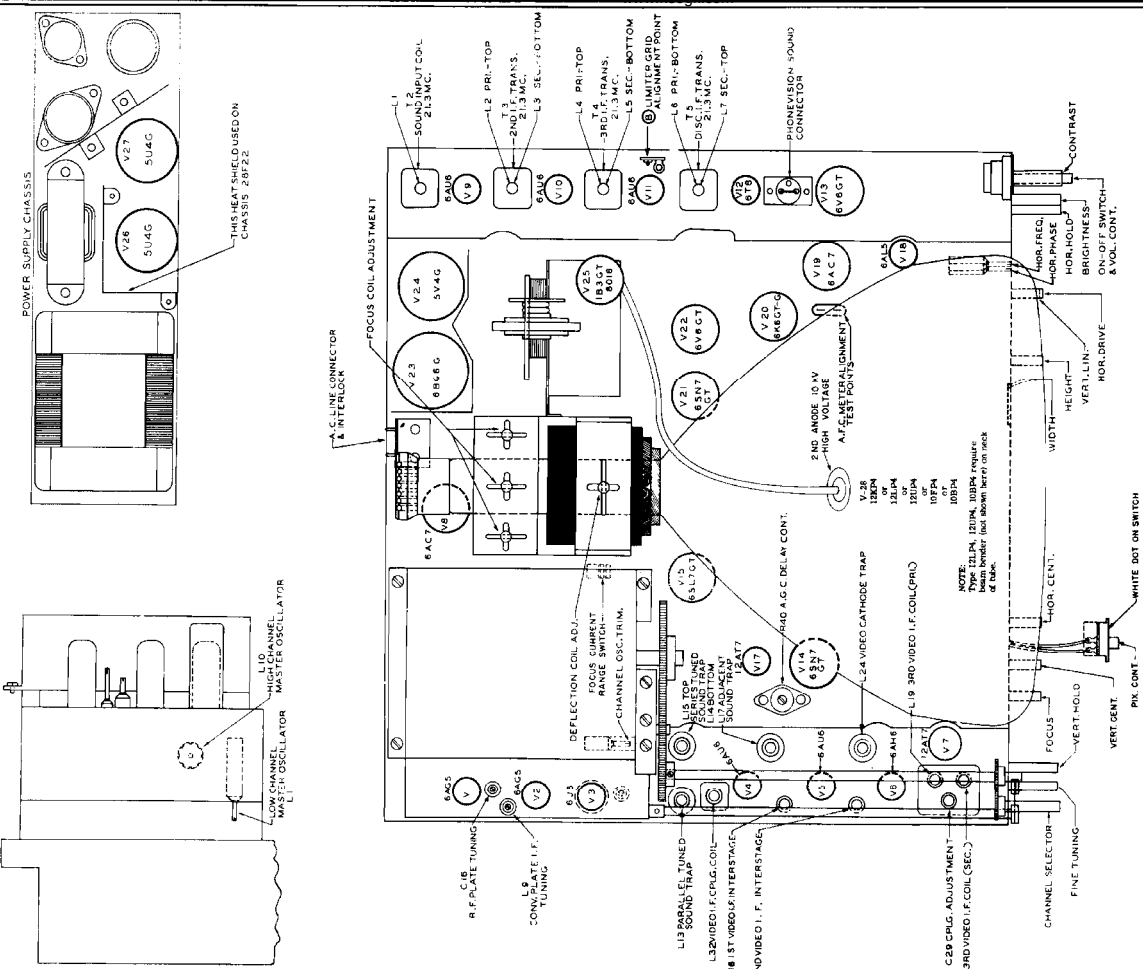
Tube and Trimmer Layout 27F20 Chassis
